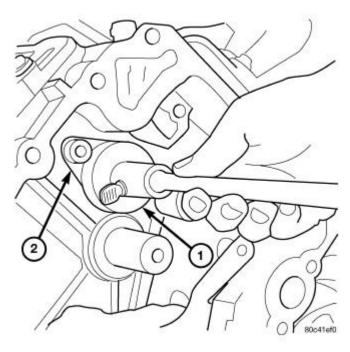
BALANCE SHAFT REMOVAL/INSTALLATION TOOL Courtesy of CHRYSLER LLC
